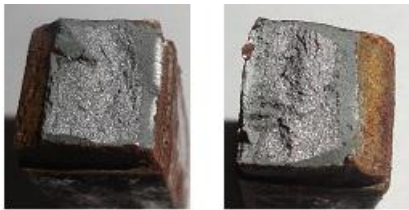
Fracture surfaces of the impact specimen (HNO₃ treated)
